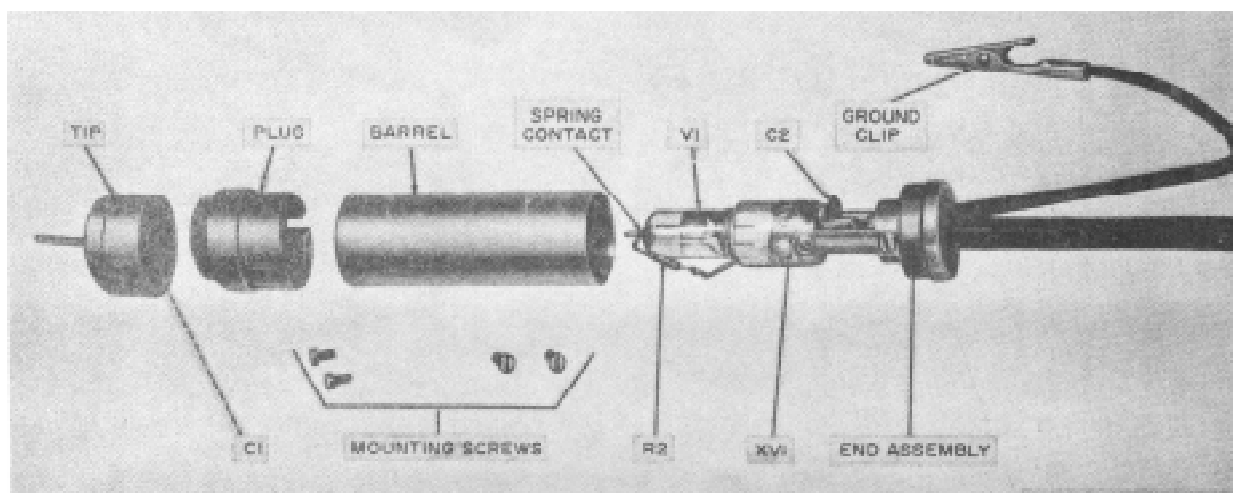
Unchanged Multimeters ME-26B/U and ME-26C/U, AC probe disassembled.
